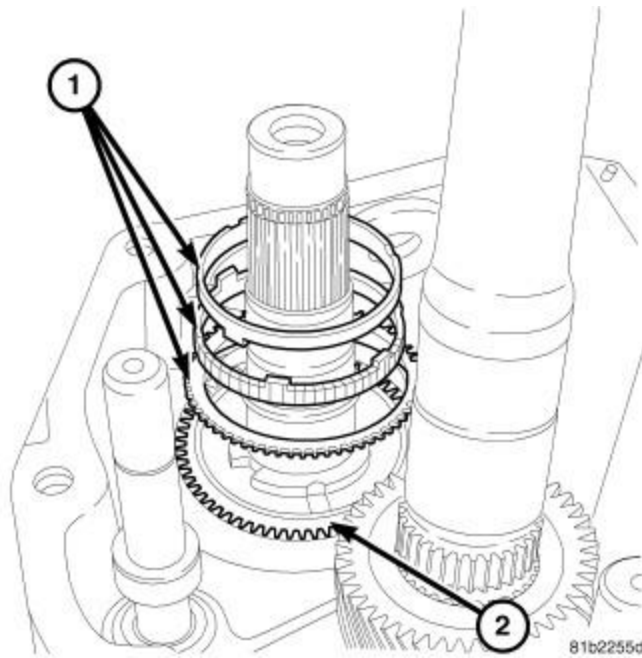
Fifth Gear Synchro Rings & 5-6 Synchronizer Hub
